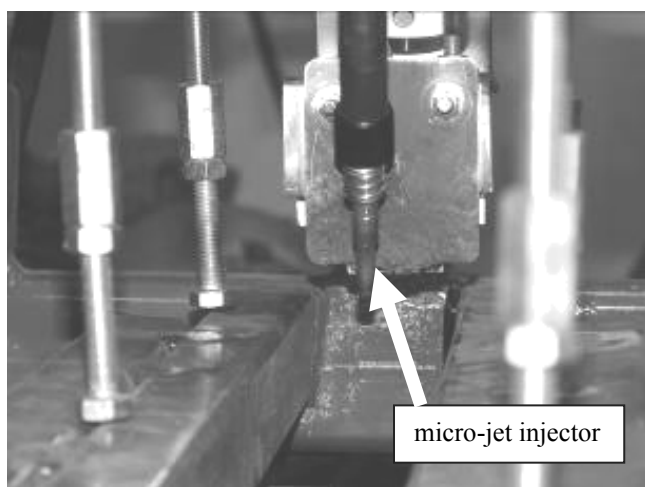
Equipment for MIG welding with micro-jet injector (main view)
